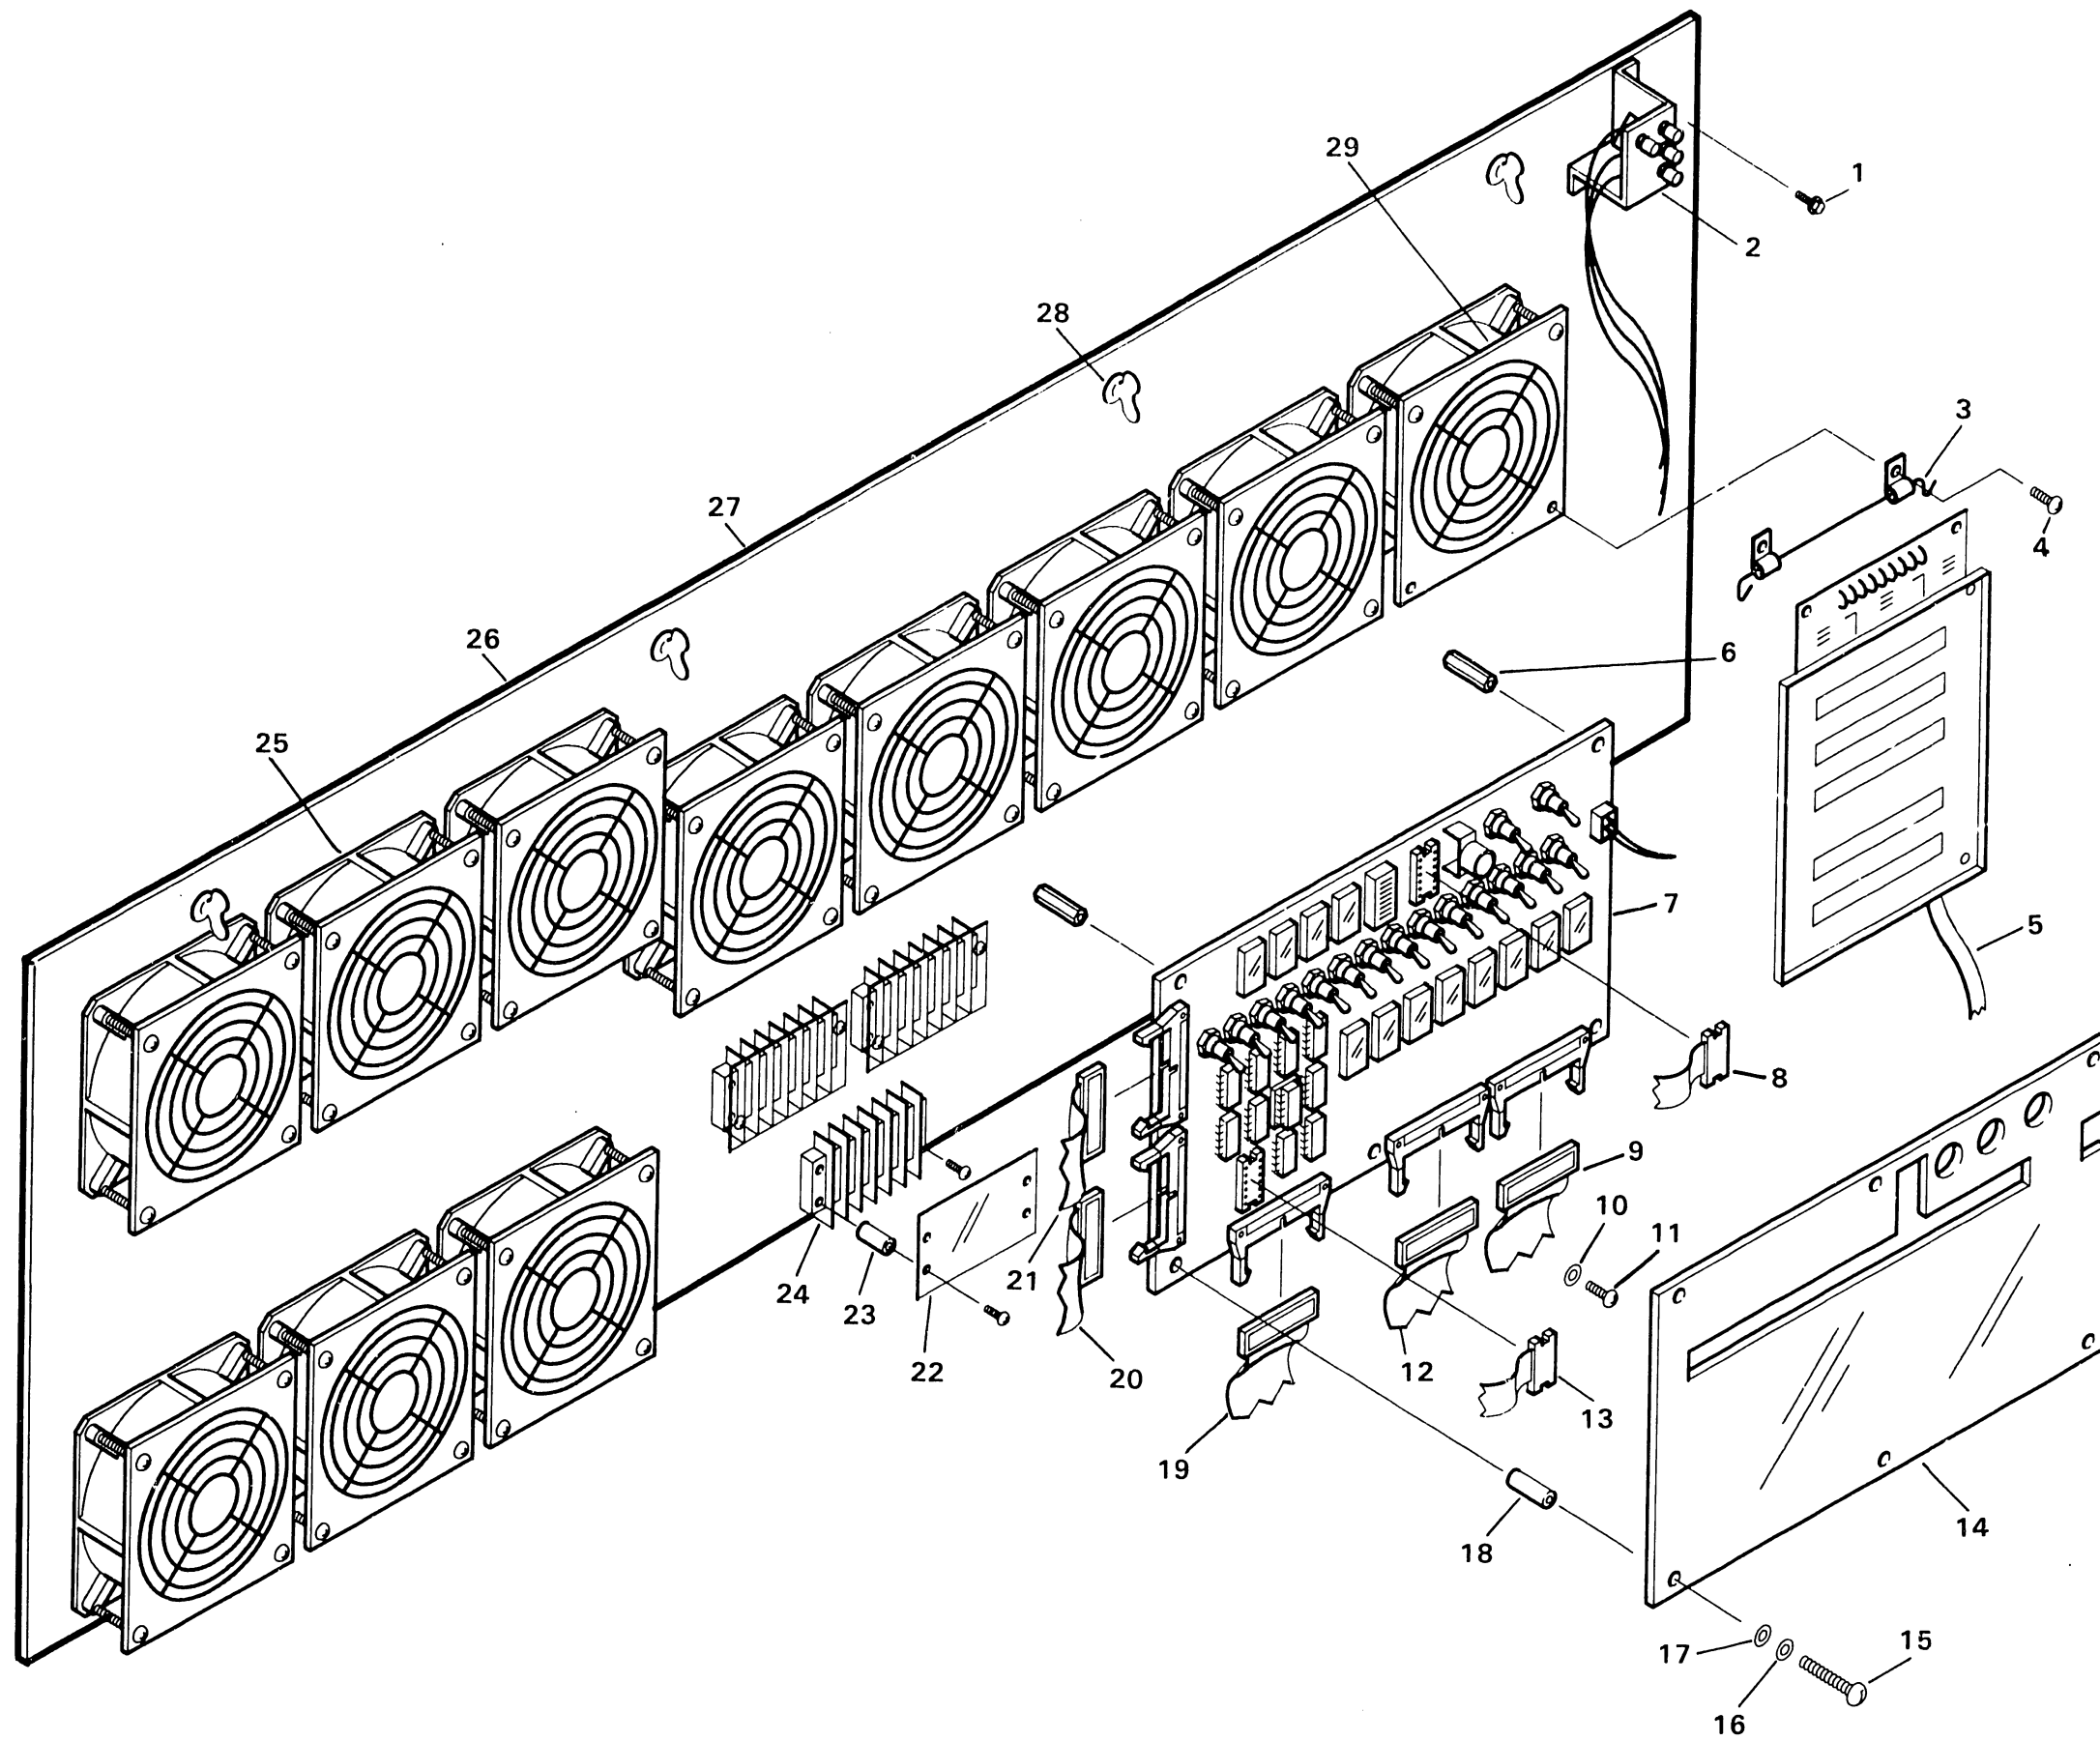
VS-100 FAN ASSEMBLY (ASSEMBLY PART NO. 270-0697)
